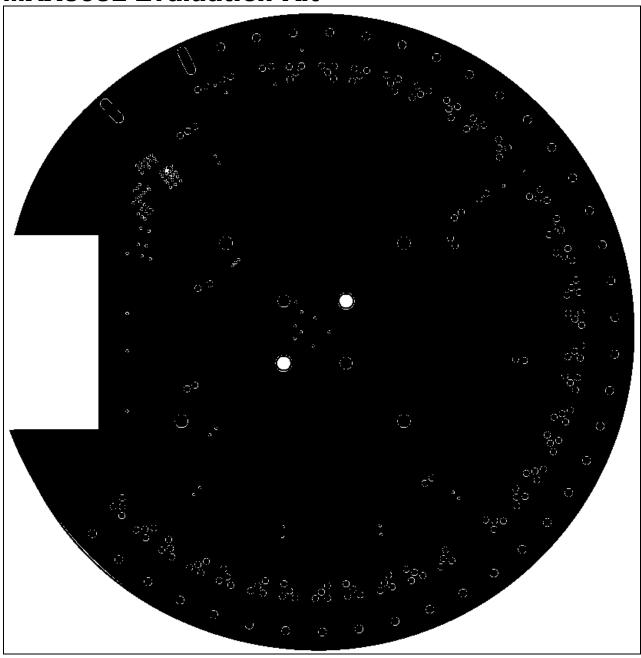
MAX3952 EV Kit PC Board Layout-Ground Plane
